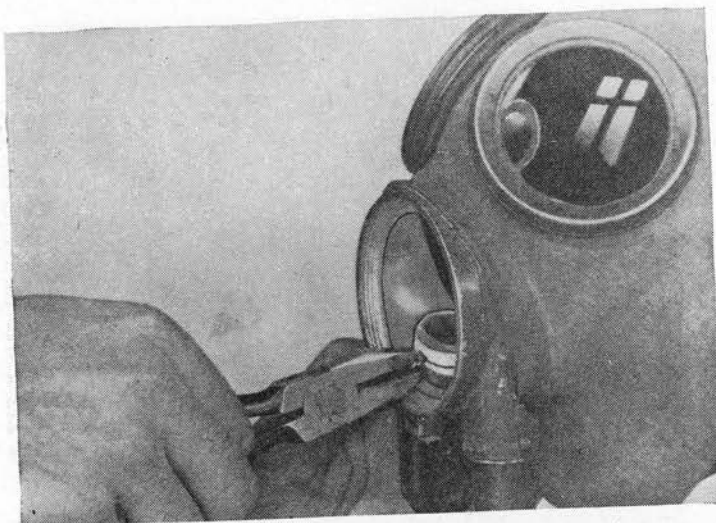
Wiring outlet valve to valve stem on MI diaphragm angletube.
